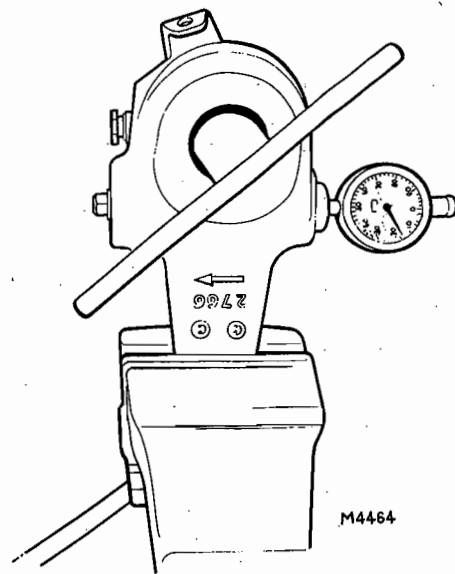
CHECKING END-FLOAT OF WORM SCREW WITH SPECIAL INDICATOR GAUGE
